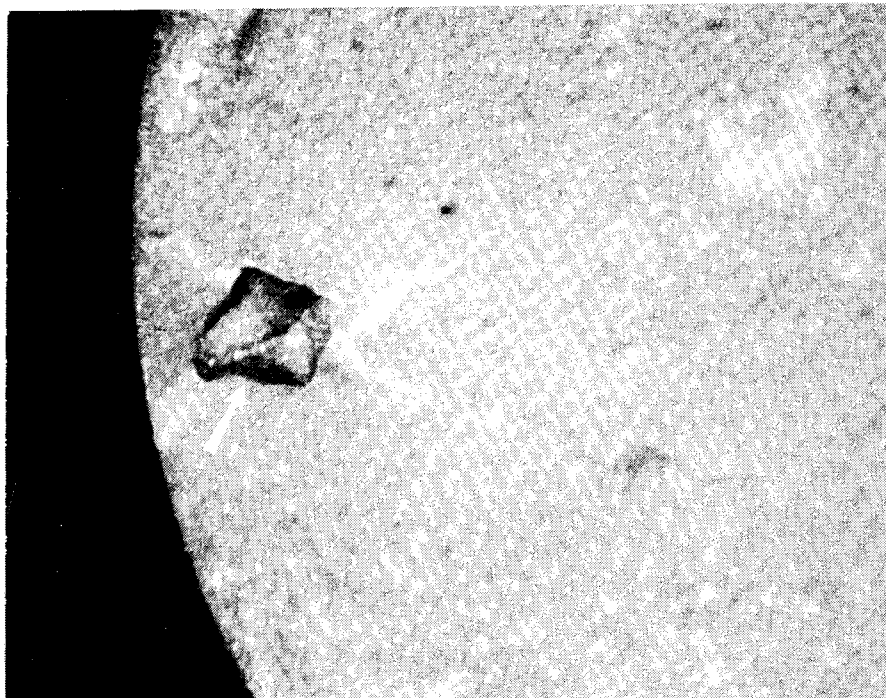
Fractography of rotating beam specimen B14 (45x).
